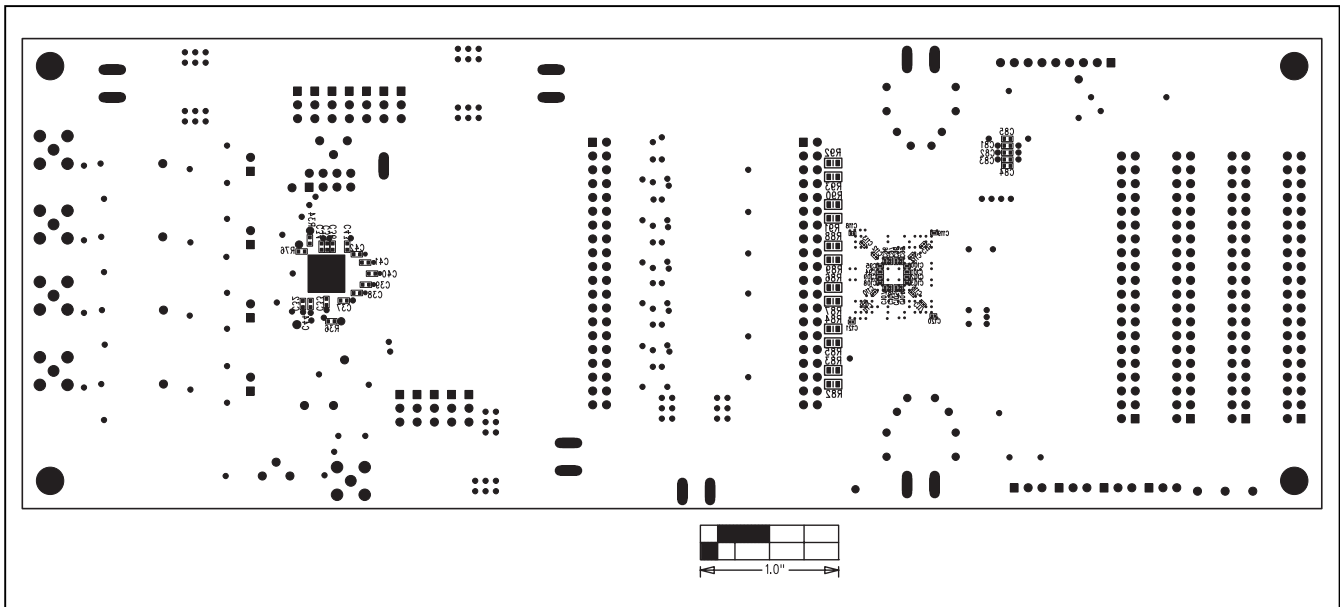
MAX1127 EV Kit Component Placement Guide—Solder Side
